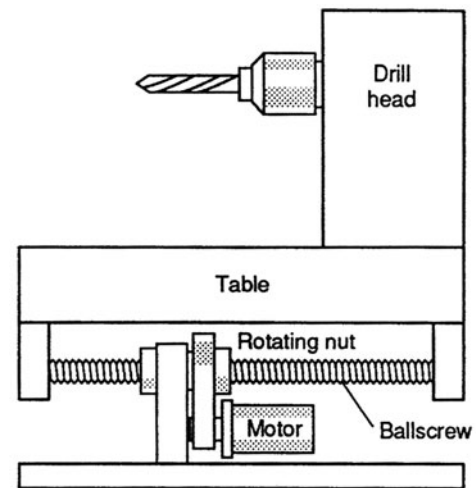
A stage of a transfer machine is required to drill a number of holes in a casting using a multihead drill. The motor has to drive the drill head at high speed to within 2.5 mm (0.1 inch) of the workpiece and then proceed at cutting speed to the required depth. Drill is now withdrawn at an intermediate speed until clear of the work and then fast retracted, ready for the next cycle. Complete drilling cycle takes 2.2 seconds, with a 0.6-second delay before the next cycle. Due to proximity of other equipment, the length in the direction of travel is very restricted. An additional requirement is to monitor the machine for drill wear and breakage. The combined requirements of high speed, high duty cycle and of monitoring the drill wear all point to use of a servomotor. By checking torque load on the motor (achieved by monitoring drive current), one can watch for increased load during the drilling phase, pointing to a broken drill. Application will require a ball-screw drive to achieve high stiffness together with high speed. One way of minimizing the length of the mechanism is to attach the ball screw to the moving stage and then rotate the nut, allowing the motor to be buried underneath the table. Since access for maintenance will then be difficult, a brushless motor is suggested. (Parker-Hannifin Corporation, Compumotor Division.)
